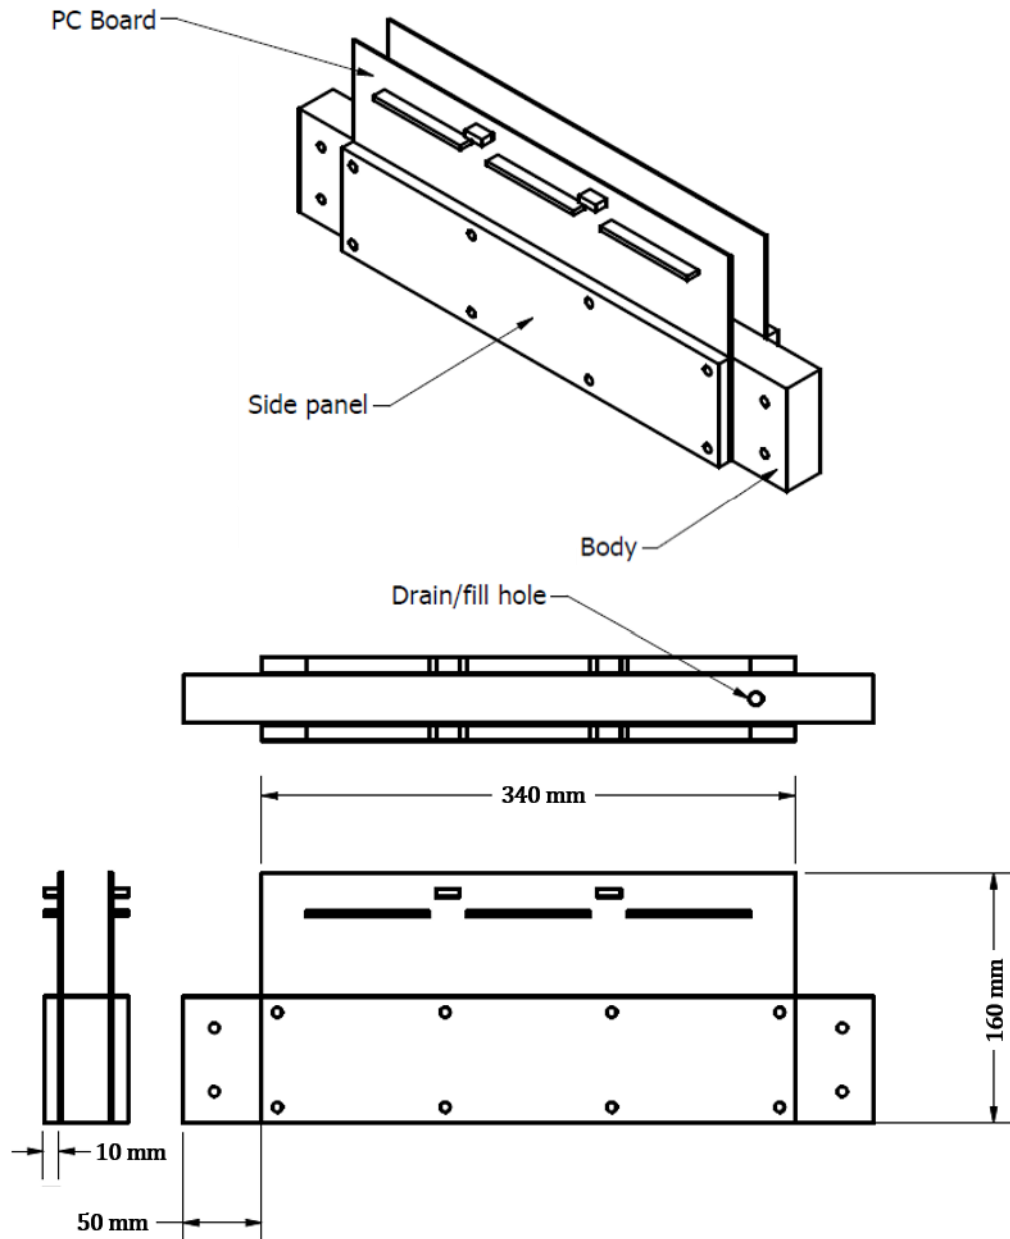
CAD drawing of test article assembly showing major components, including acrylic body, printed circuit boards, and acrylic backing plates used to clamp PCBs to acrylic body and stiffen them.
